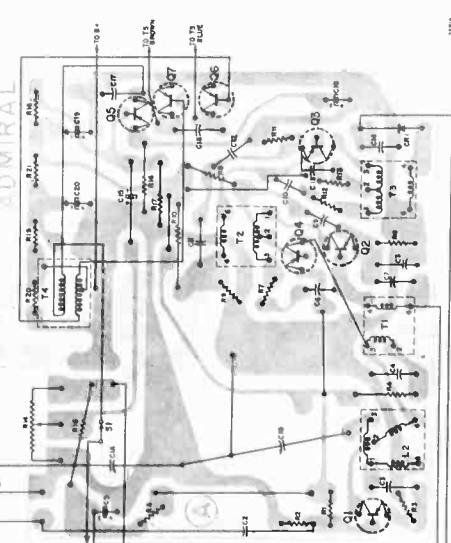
View of Printed Wiring Board. NOTE: Gray area represents printed wiring, black symbols and lines represent components, wiring and connections on opposite side.
